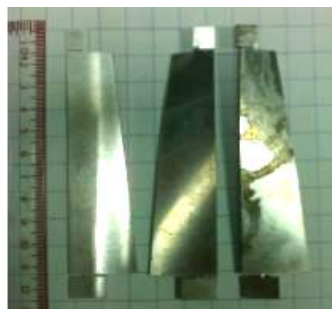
The Blades to be Fabricated (From Left to Right): Straight Blade, Forward Twisted Blade, and Backward Twisted Blade
